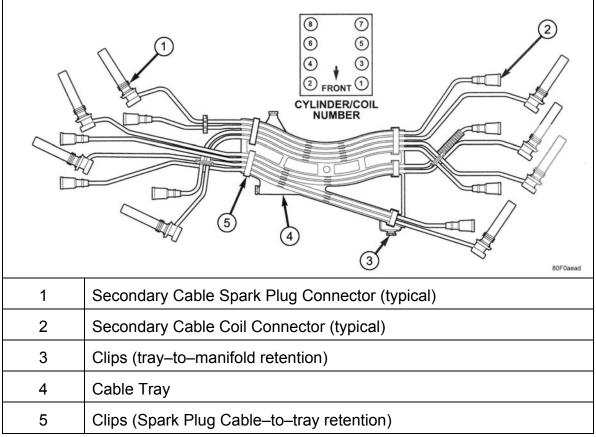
5.7L Spark Plug Cable Routing and Cable Tray
